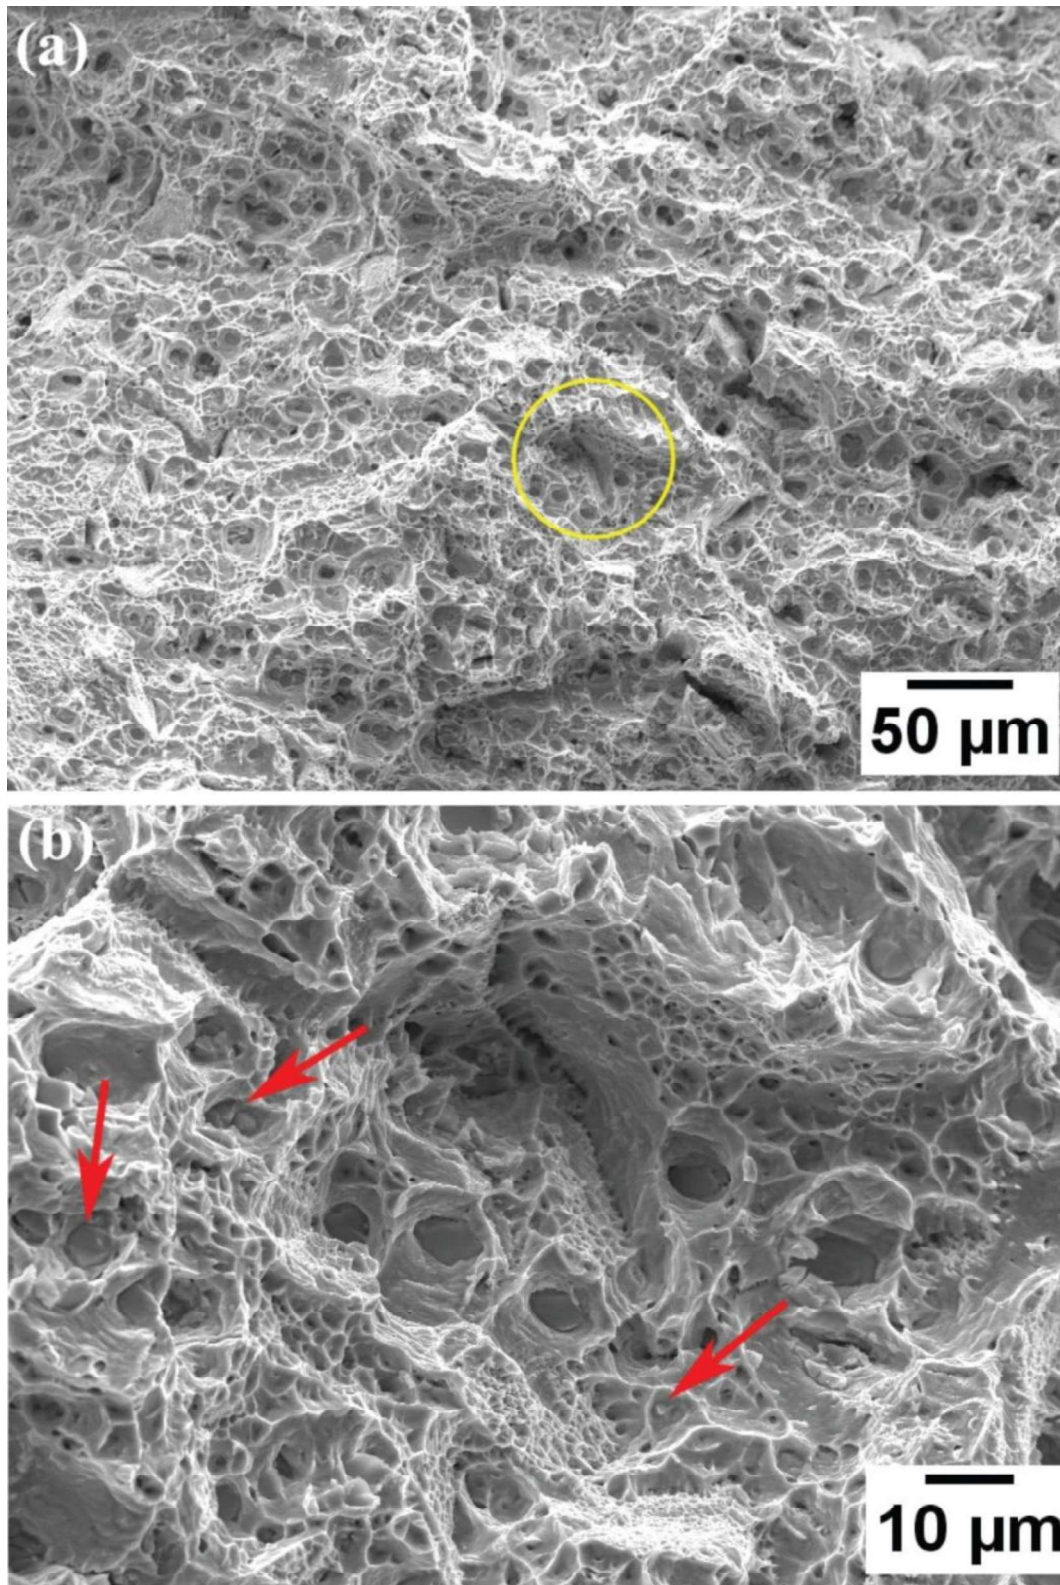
(a) Fractograph of fractured surface of *RT* tensile tested *ST*-alloy; (b) zoomed view of encircled region of Figure (a) in which carbides are marked by arrows.
